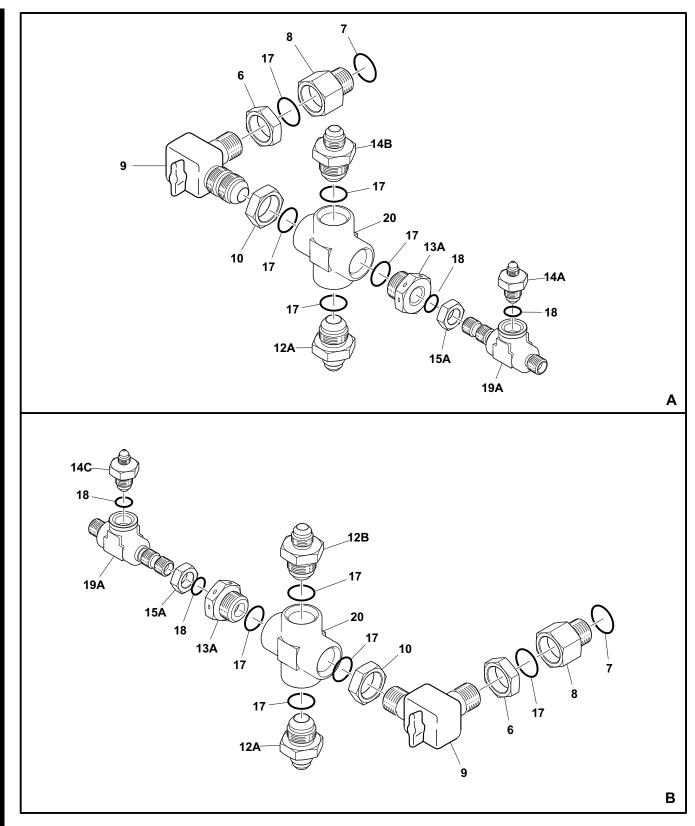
Engine Assembly (Sheet 2 of 3)
